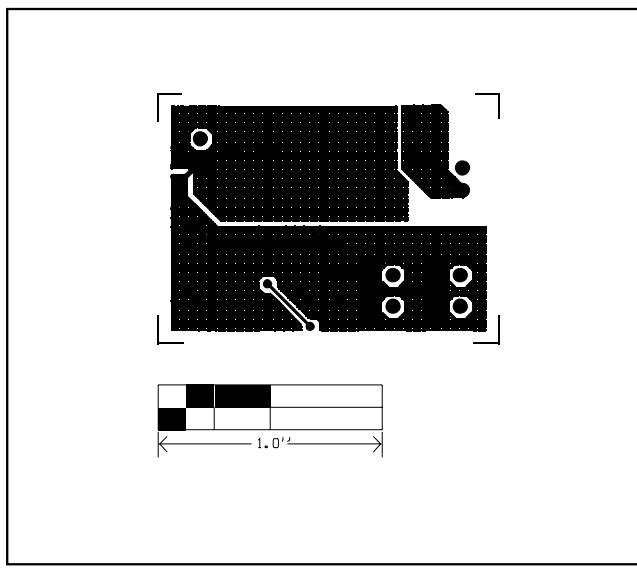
MAX16802B EV Kit PC Board Layout—Solder Side
